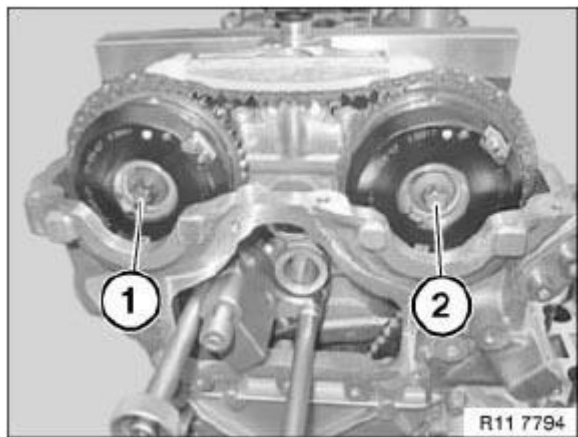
Identifying Inlet And Exhaust Camshaft Central Bolts
